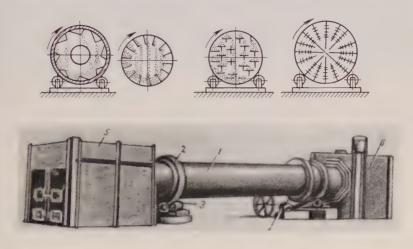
Rotary kiln drier and baffles: 1—drum; 2—rim; 3—rollers; 4—drive; 5—firebox; 6—charging end
